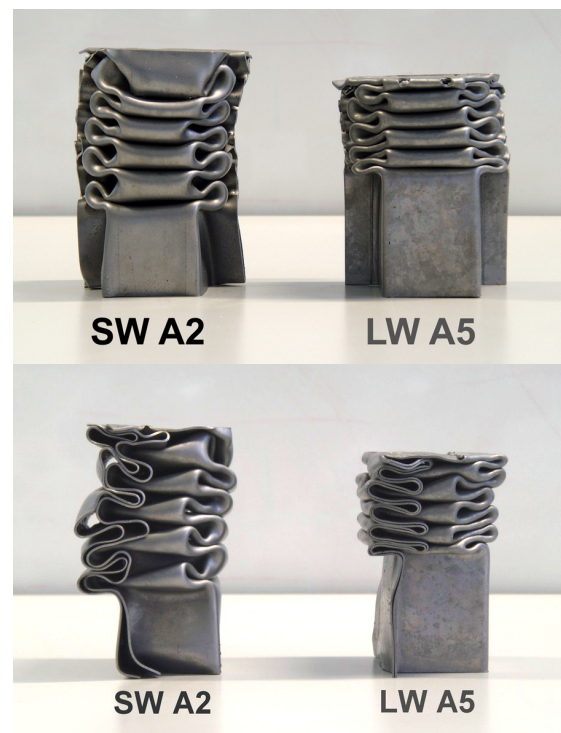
Folding patterns in quasi-static tests on spot welded and laser welded crash box columns, A solution.
